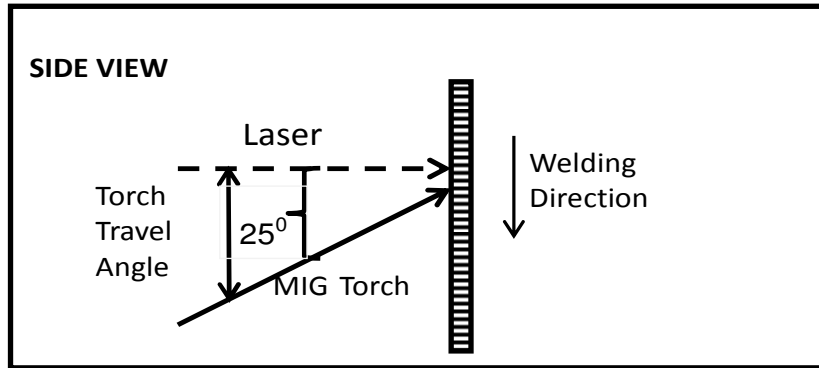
Schematic of position of laser and MIG in vertical down hybrid welding.
